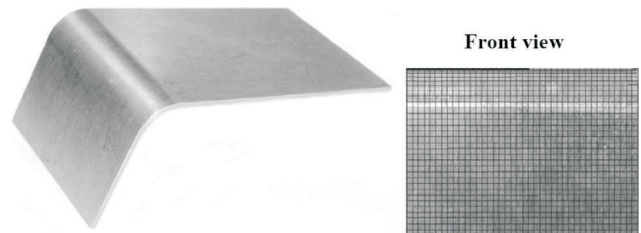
Photograph of deformed mesh and formed shape of the workpiece in the L-bending process.
